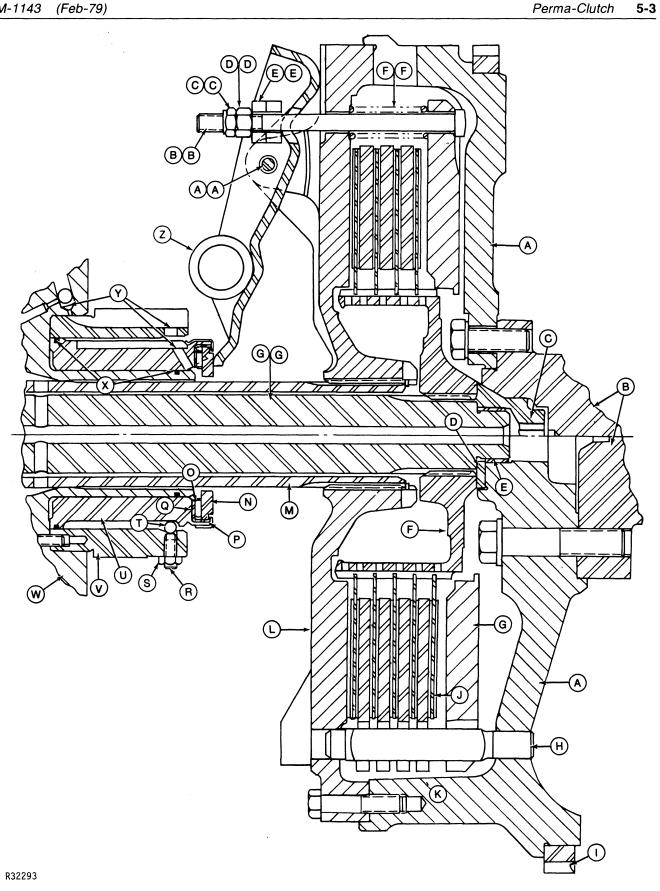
Perma-Clutch Assembly (8430 Top; 8630 - Bottom)
